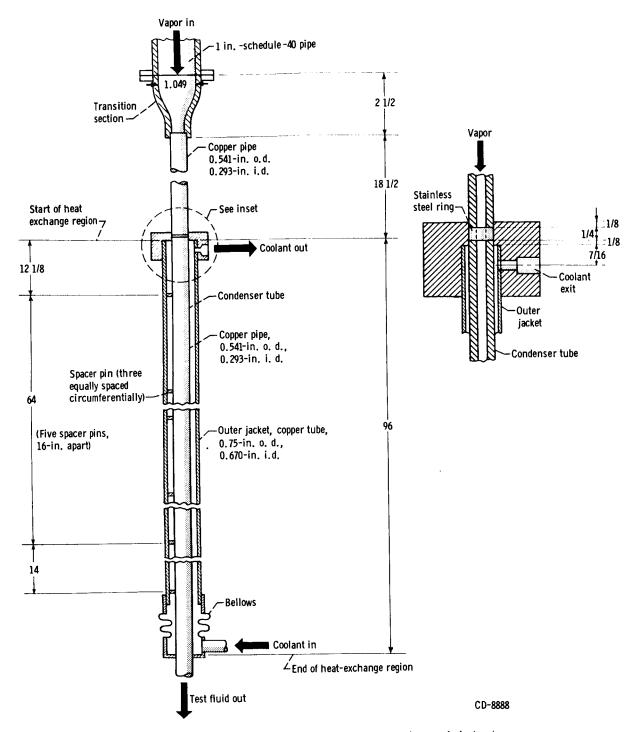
Single-tube condenser test section. (Dimensions are in inches.)
